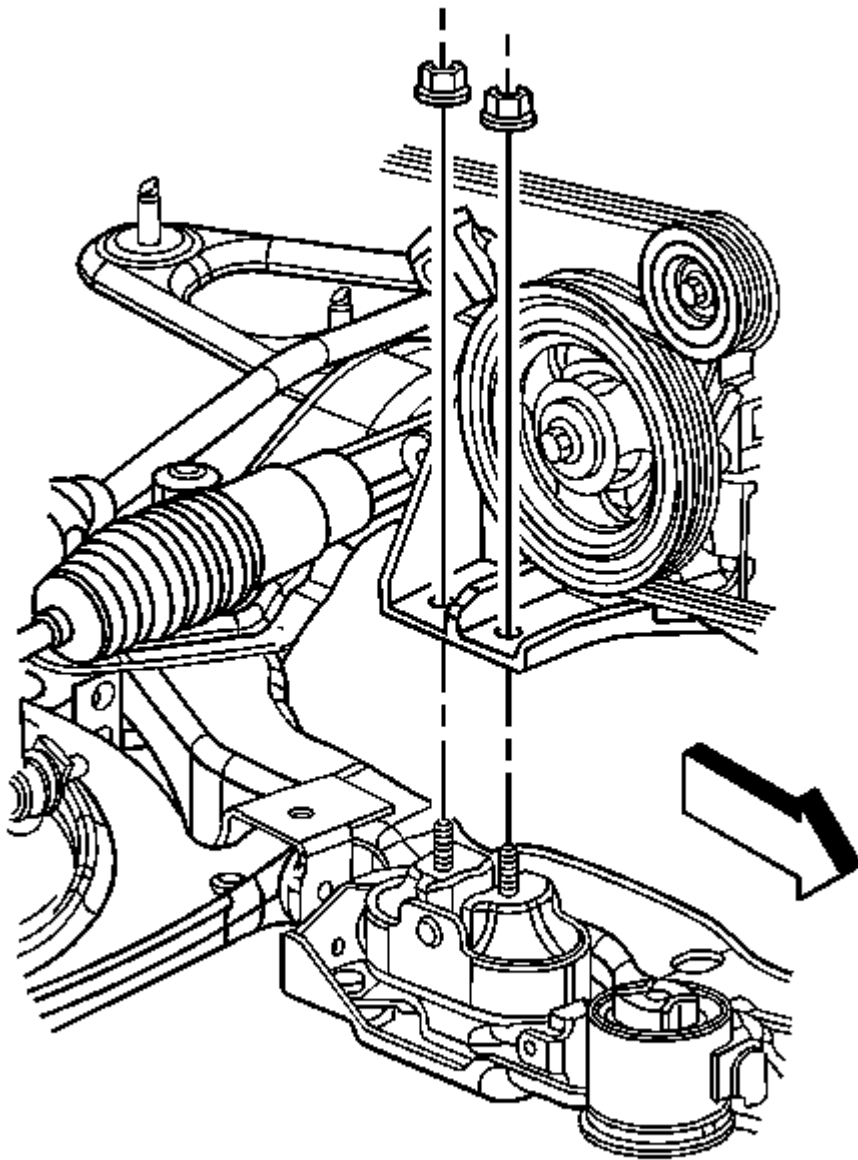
Identifying Engine Mount To Engine Mount Bracket Nuts
